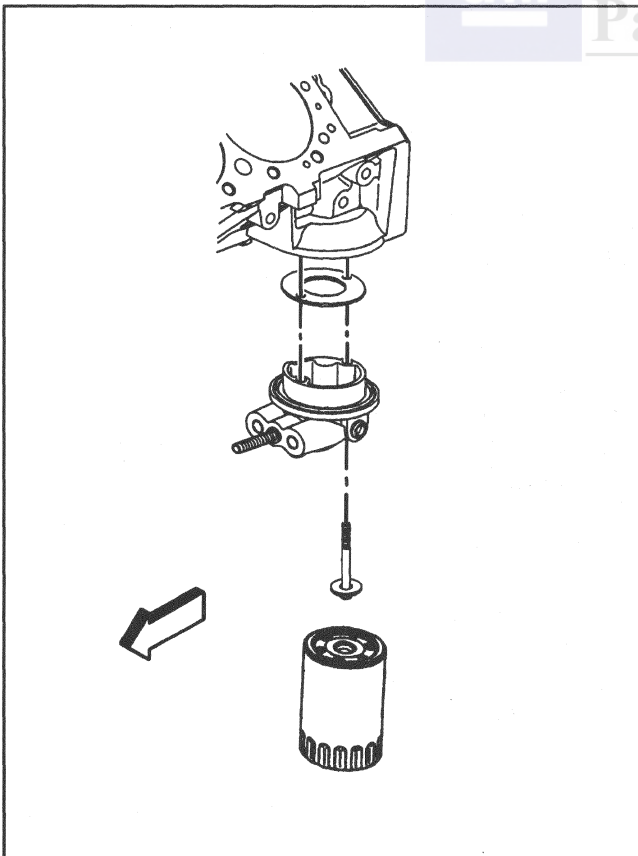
Oil Cooler Adapter, Seals, and Oil Filter
